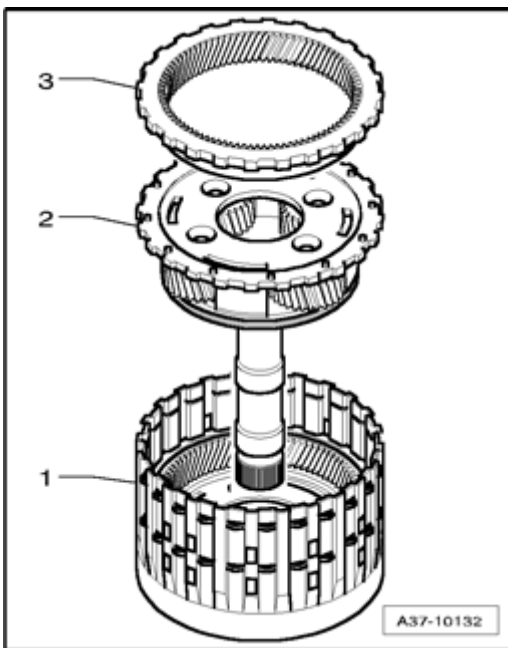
Ring Gear "III", Planetary Carrier "II" And Ring Gear "I"
